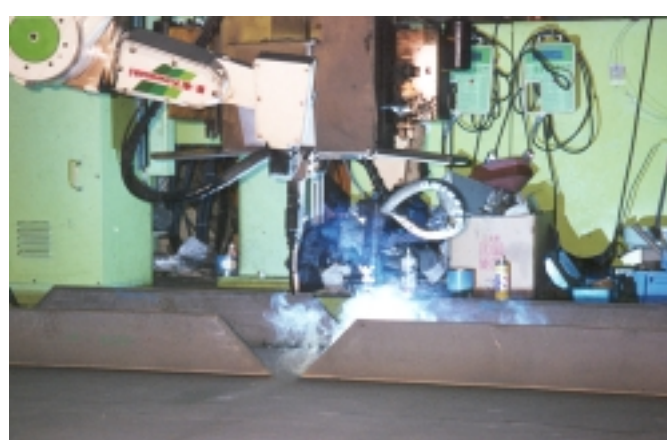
Automated web panel fabrication with NC welding robots at Shikoku plant of Kawada Industries, Inc., in Japan.
